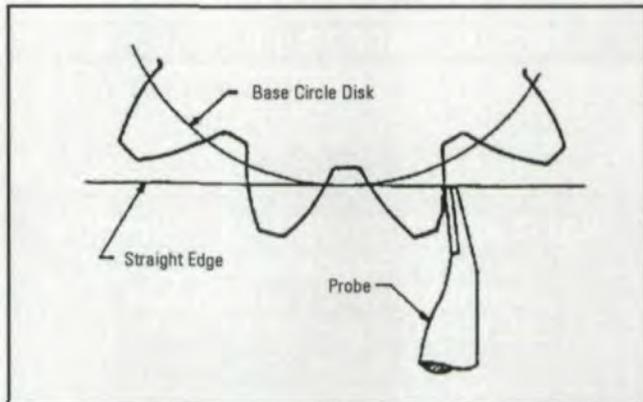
Involute Profile Testing Probe. © ANSI/AGMA 2000-A88.
